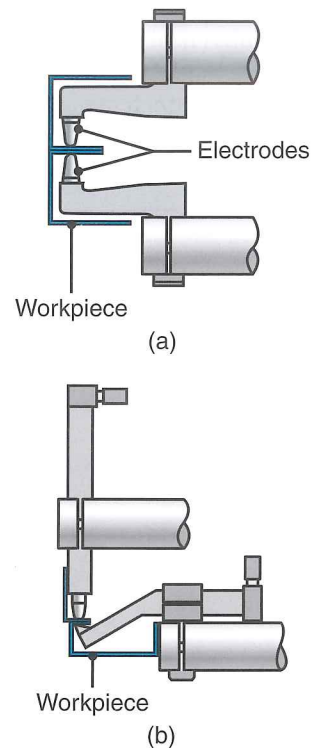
Two electrode designs for easy access to the components to be welded.
